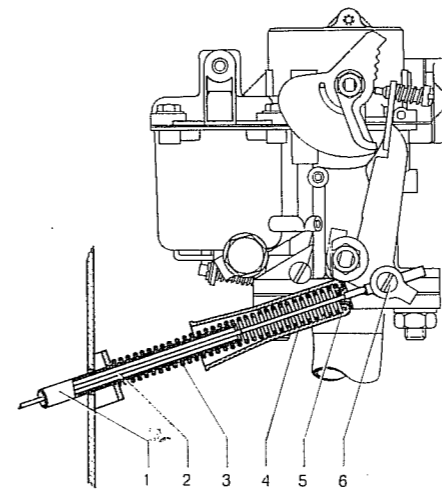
Throttle cable connection at the carburettor (Early cars.)
